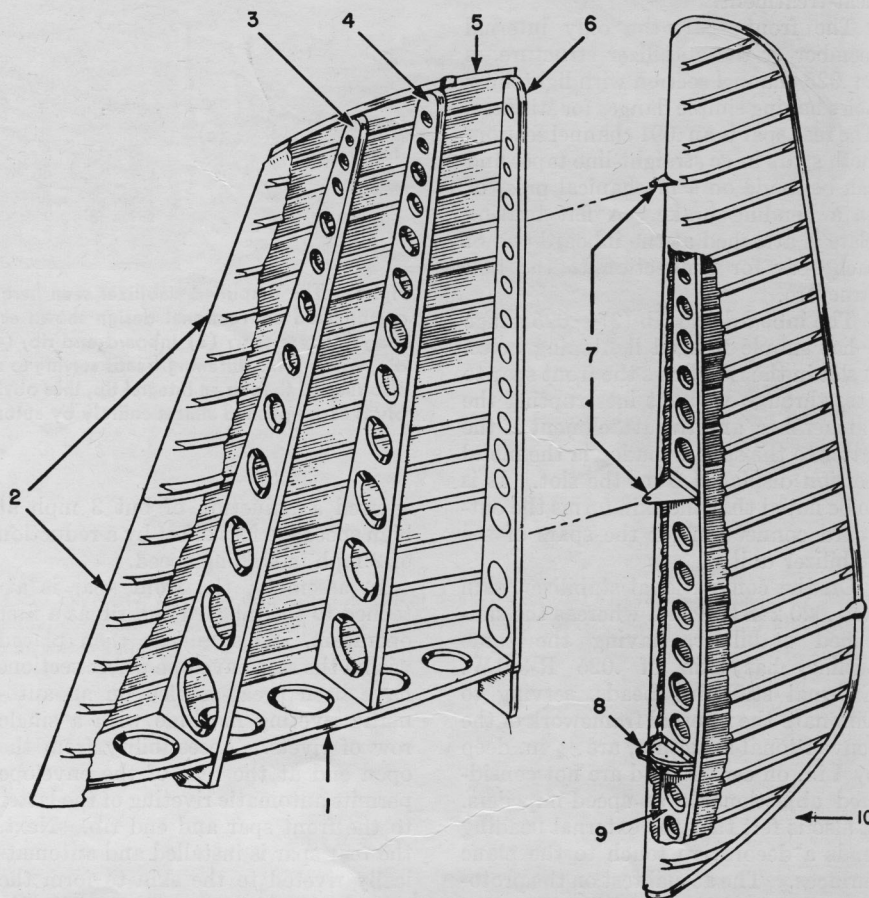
Fin and rudder assembly: (1) fin bottom end rib; (2) wrap-around skin; (3) front spar; (4) center spar; (5) integral skin tip; (6) rear spar; (7) rudder hinge fitting; (8) combination hinge and horn fitting; (9) spar; (10) wrap-around skin joined at the T.E. It was contemplated to build a rudder of left and right clamshell sections joined along external flanges at both L.E. and T.E. (around the entire periphery), thus eliminating the spar.
